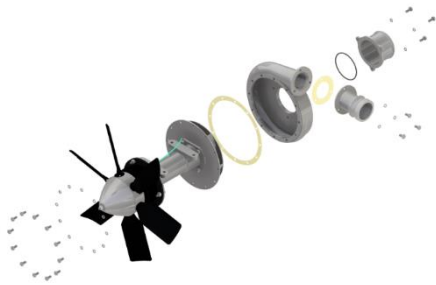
removal of nuts and screws to replace O'Ring and gaskets.
